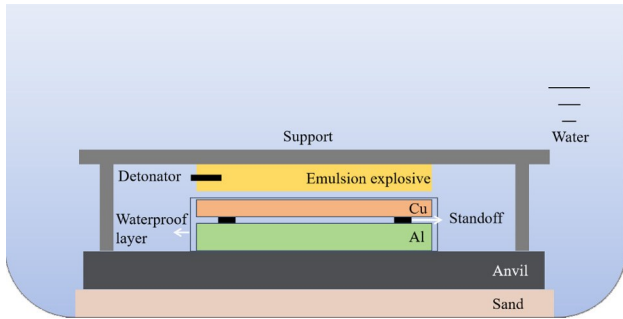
Schematic diagram of underwater explosive welding device
